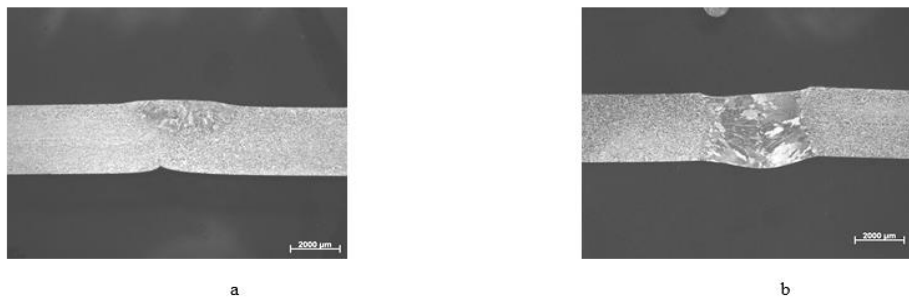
Macrosection of the welding joints of 304L stainless steel (of 3 mm width) produced by traditional TIG welding (a) and with the feeding of the gas-powder mixture into the welding zone (b)
